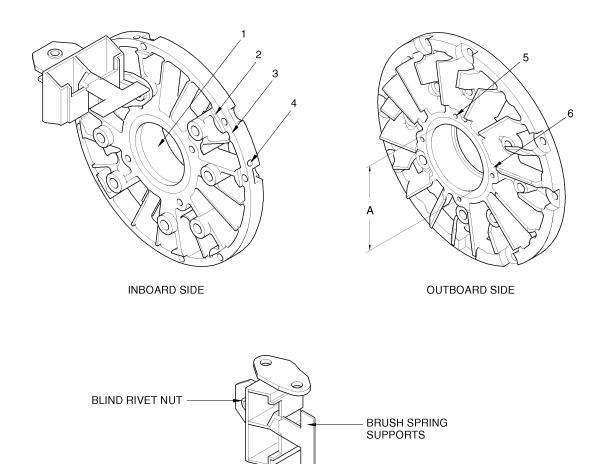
Bearing and Brush Support Assembly, Inboard and Outboard Side
